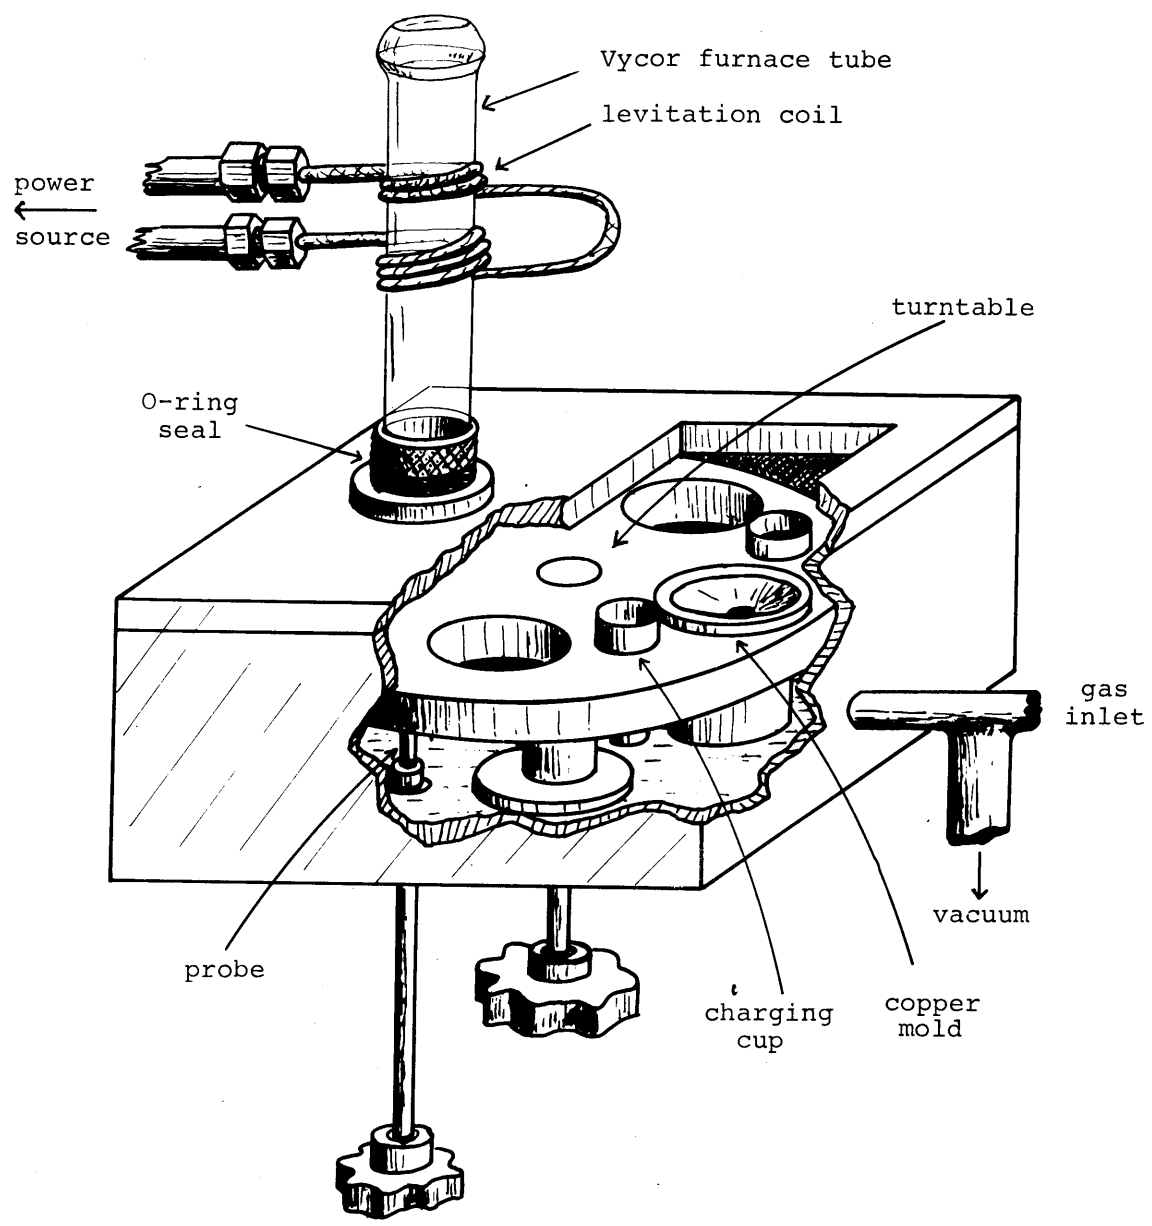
Cutaway view of the changing and casting unit and the levitation furnace.
